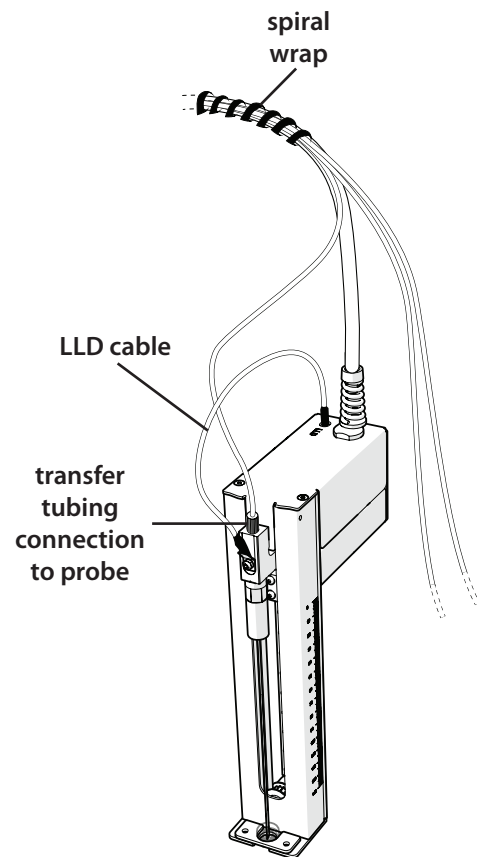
Transfer Tubing Connection and Tubing Containment Using Spiral Wrap
